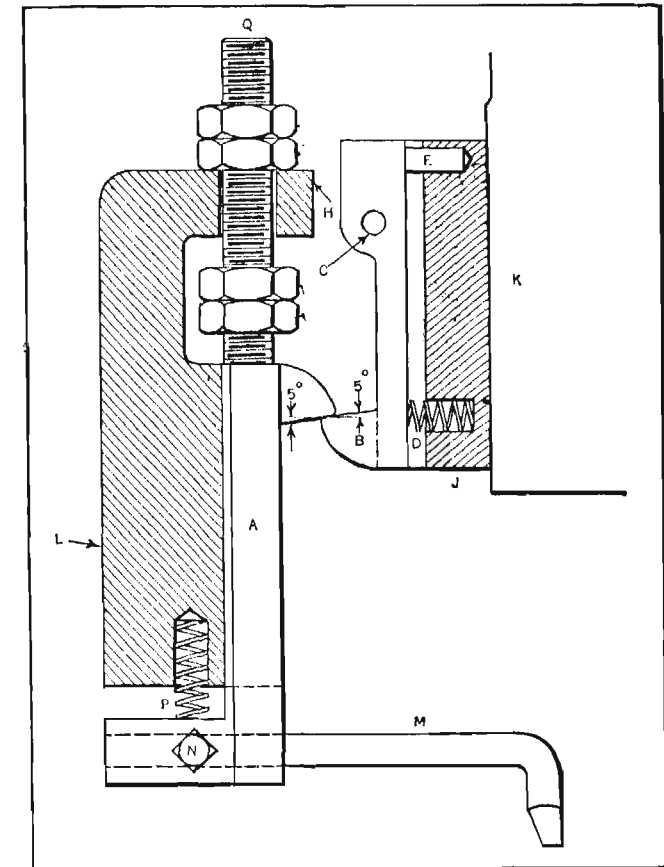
Stock Gage Which Moves with the Punch After Part Has Been Blanked but Holds Stock During Blanking Operation
